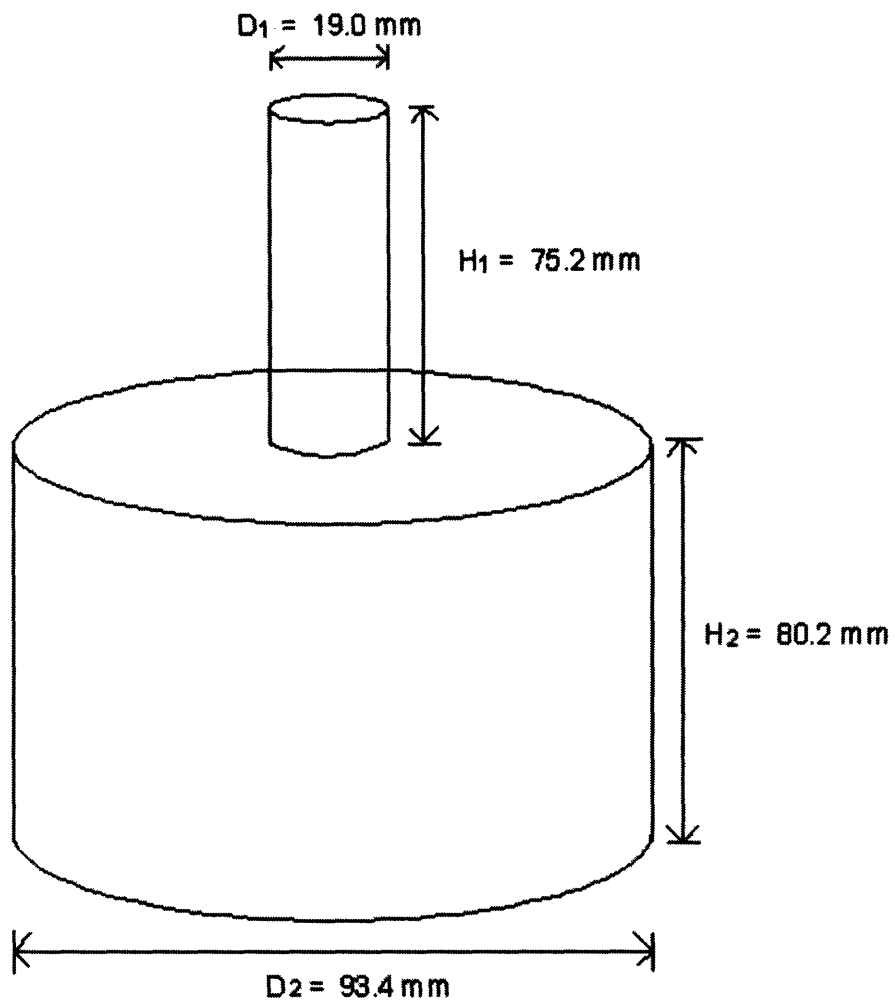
The Lexan hollow spindle. The upper section of diameter D_1 was solid and was connected to the viscometer while the lower section of diameter D_2 was hollow so that it could be filled with ferrofluid. The lower hollow section has an inside dimension with height of 73.2 mm and diameter of 86.7 mm. The dimensions shown in the figure are outside dimensions.
